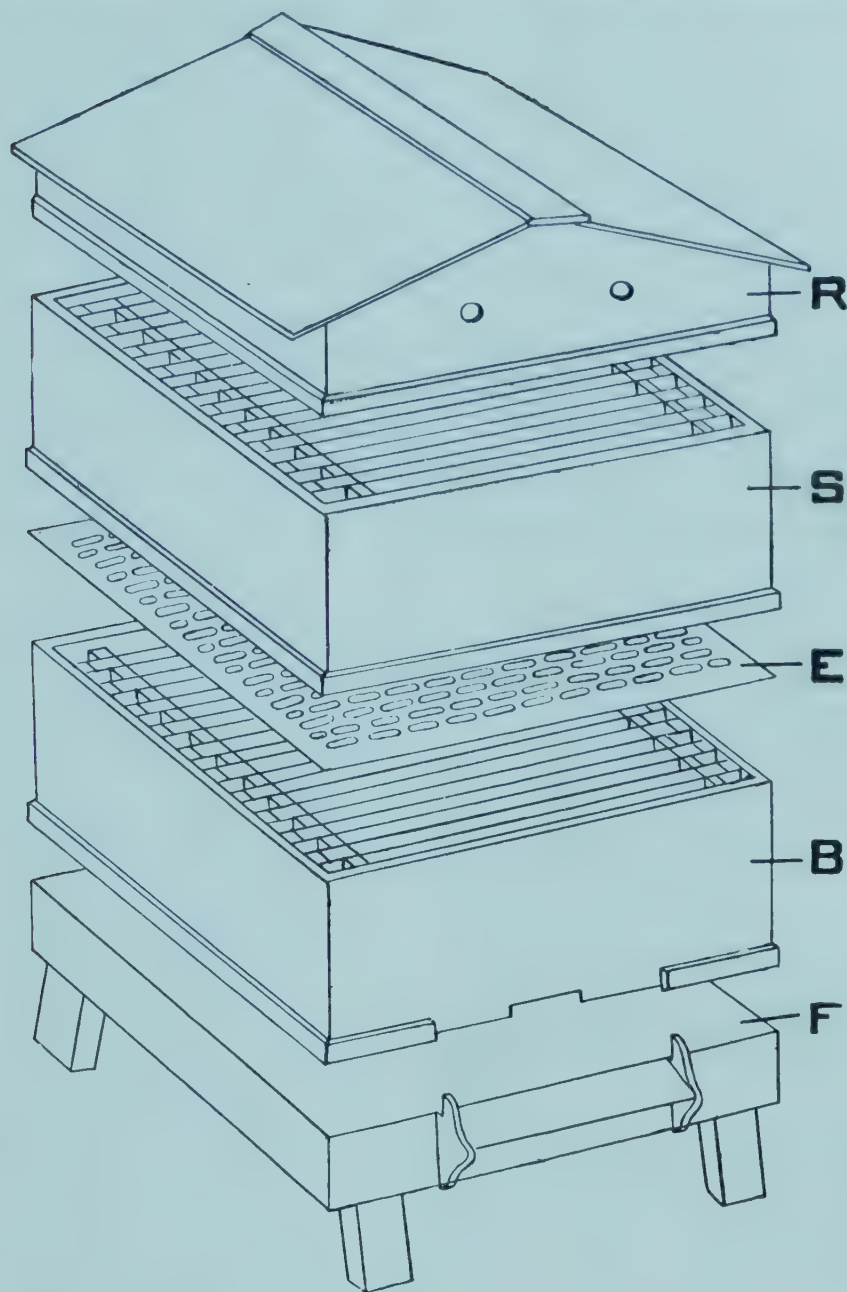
Hive fitted with super for extracted honey ; parts shown separately.
